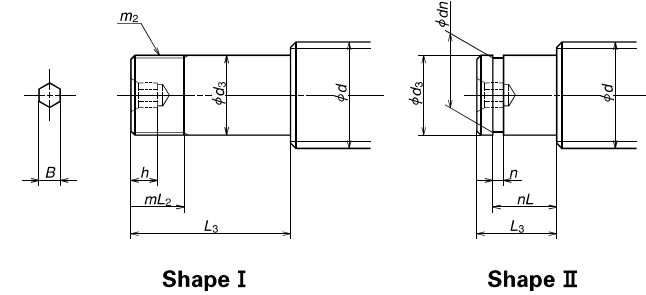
Standard shaft end configuration (opposite to the drive side)
